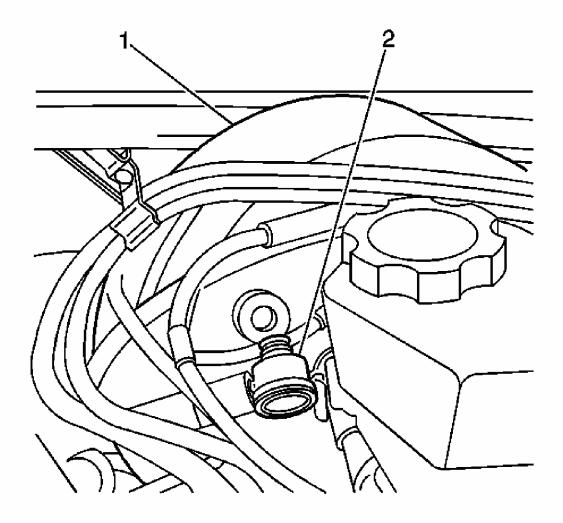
View Of Vacuum Booster & Check Valve Courtesy of GENERAL MOTORS CORP.
